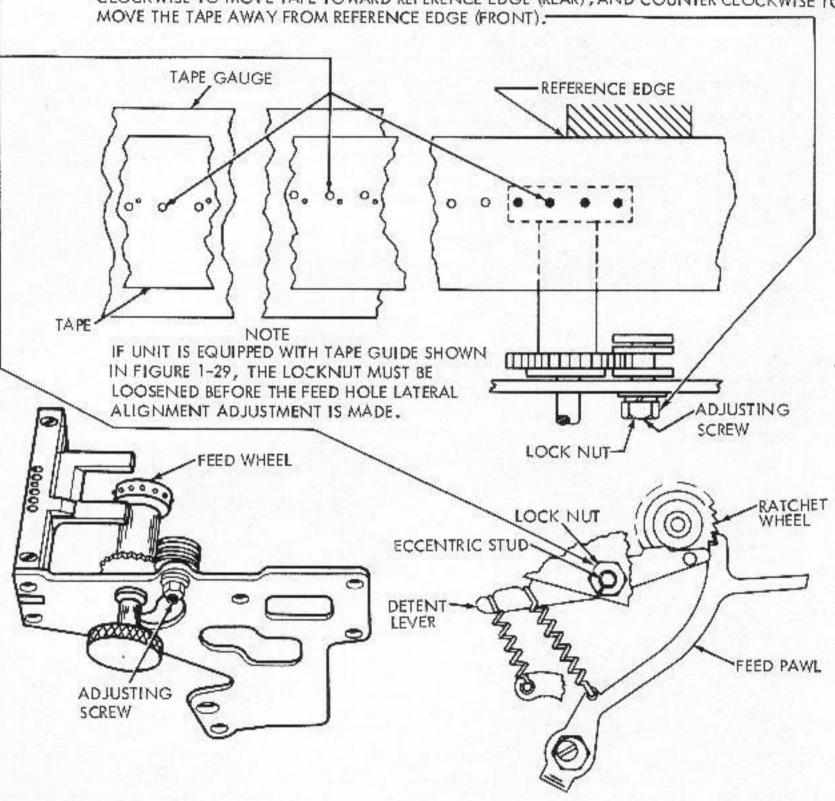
PERFORATOR MECHANISM FOR FULLY PERFORATED TAPE WITH INDENTATION OF THE FEED WHEEL FULLY PUNCHED OUT
